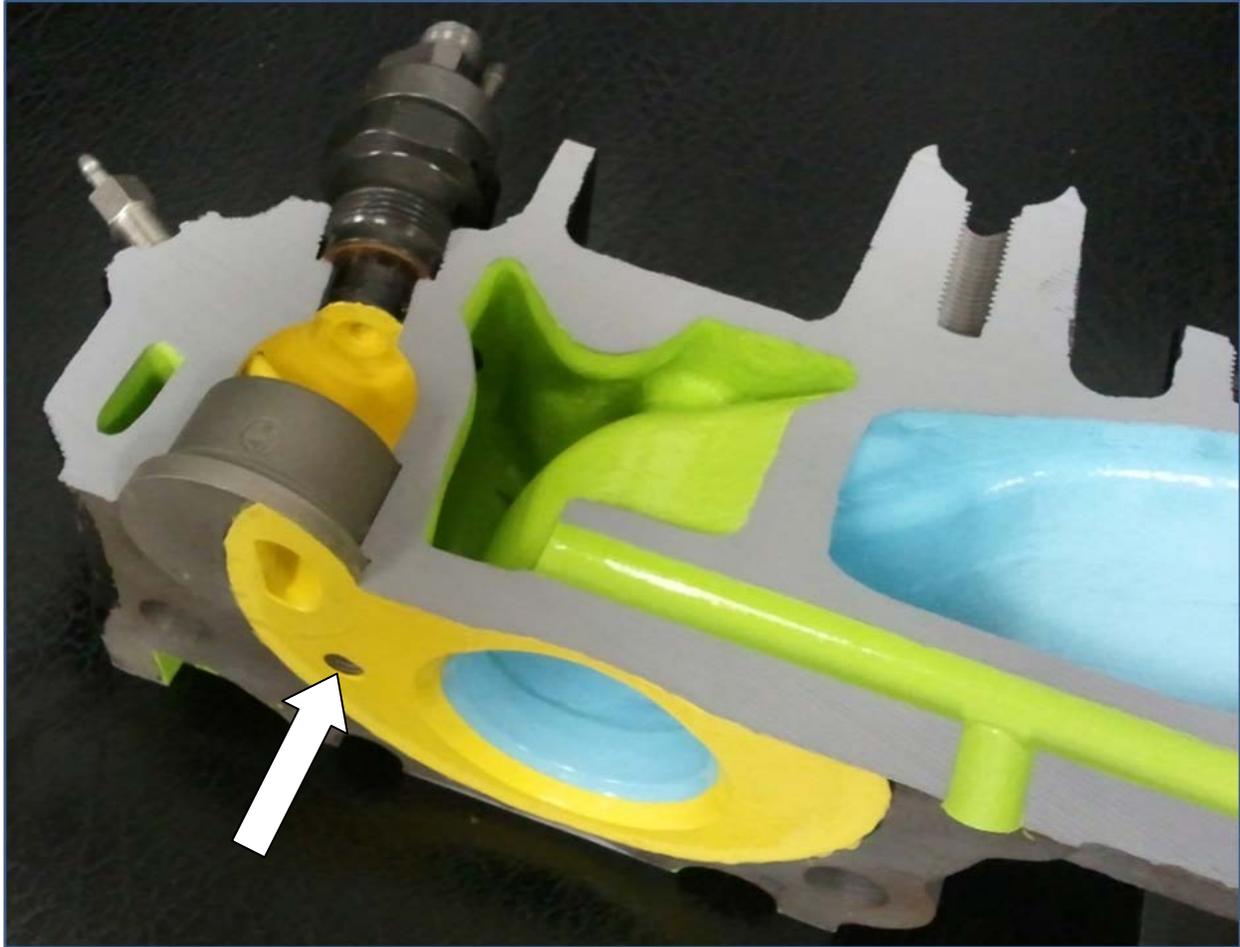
GEP 6.5T Head Cut Away with Main Chamber Pressure Transducer Location Indicated
